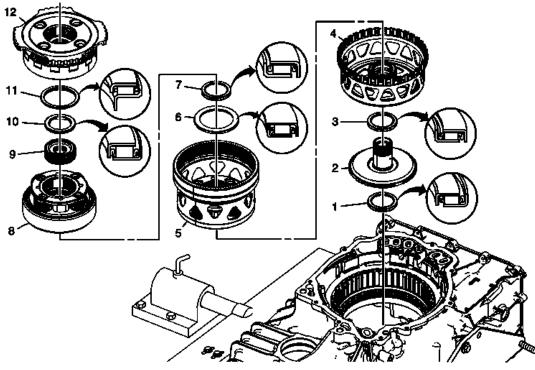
View Of Output Carrier Components Courtesy of GENERAL MOTORS COMPANY
